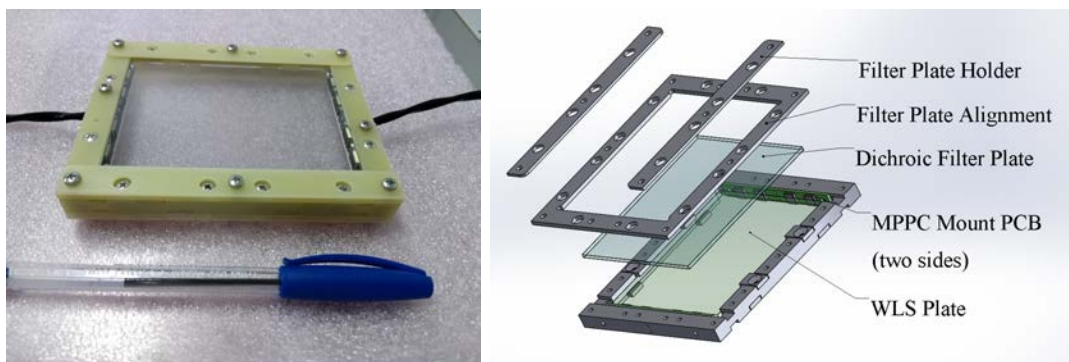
X-ARAPUCA test cell: assembled cell (left); exploded model (right). Note that exploded components can be duplicated on the back side (not shown) for double-sided test cell.
